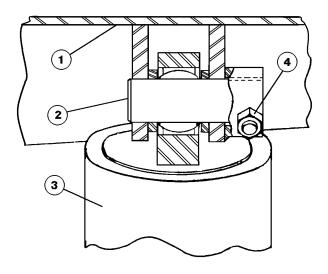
HOIST CYLINDER UPPER MOUNT
